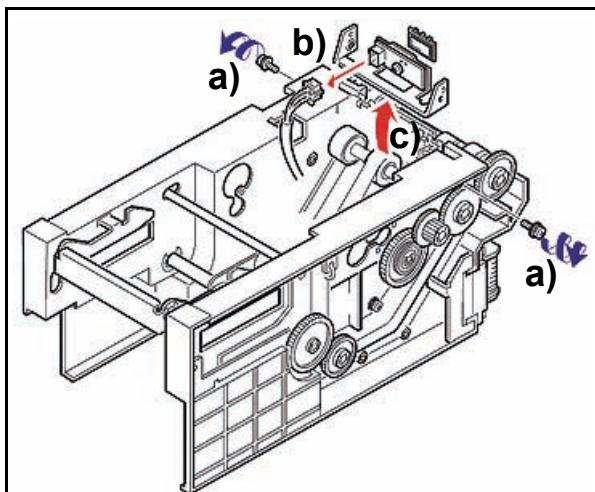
Transport Feed-Out Sensor Assembly Removal
